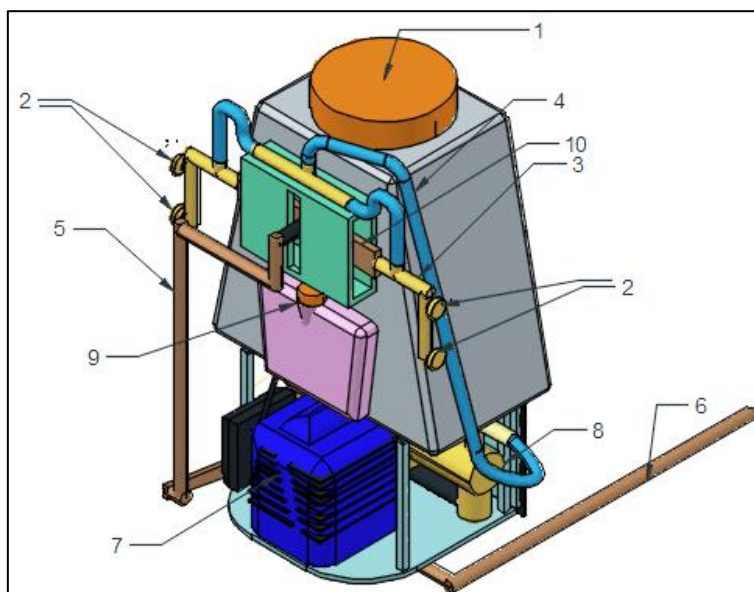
Isometric view of developed back pack type butterfly sprayer.
